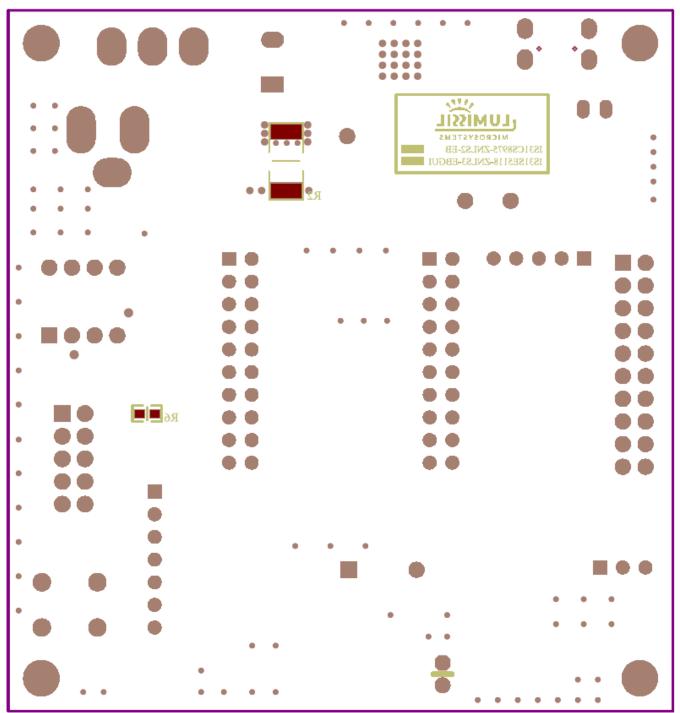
IS31CS8975 Evaluation Board Component Placement Guide - Bottom Layer
